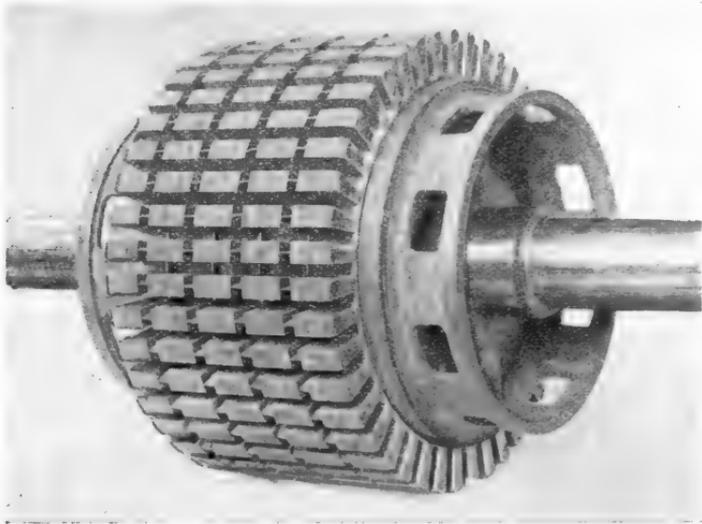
Complete Assembled Core of 50 h.p. Machine. Vickers, Sons & Maxim
